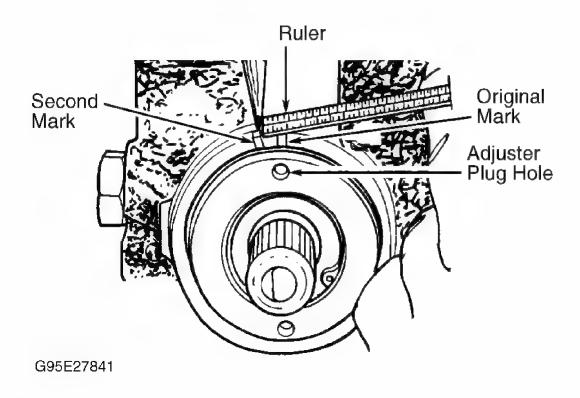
Measuring Worm Bearing Preload Courtesy of GENERAL MOTORS CORP.
